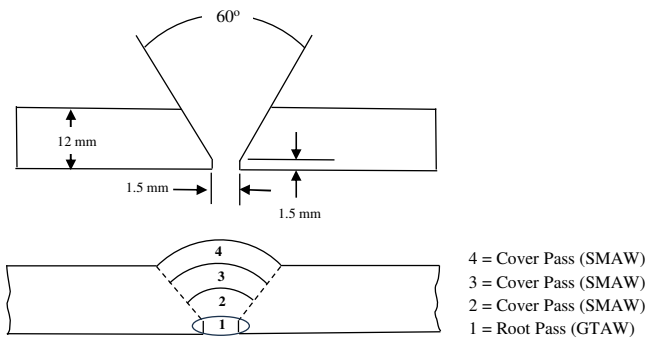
Dimensions of steel two plates and hybrid welding procedure.
